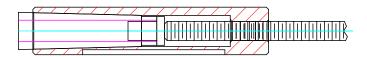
The mandrel, plug, spindle, and screw assembly.
